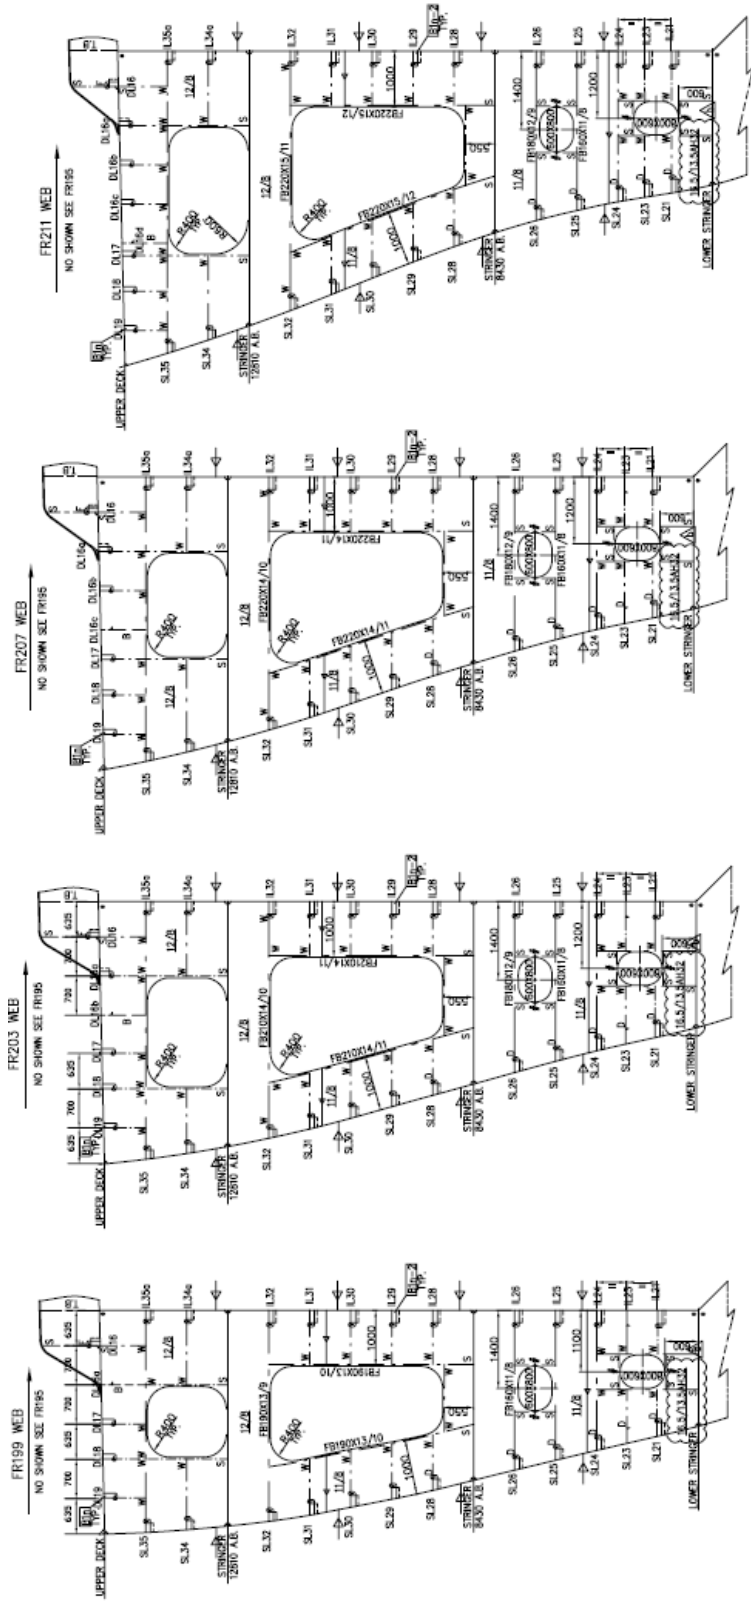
(d) – Double side construction in several frame sections, transverse view
